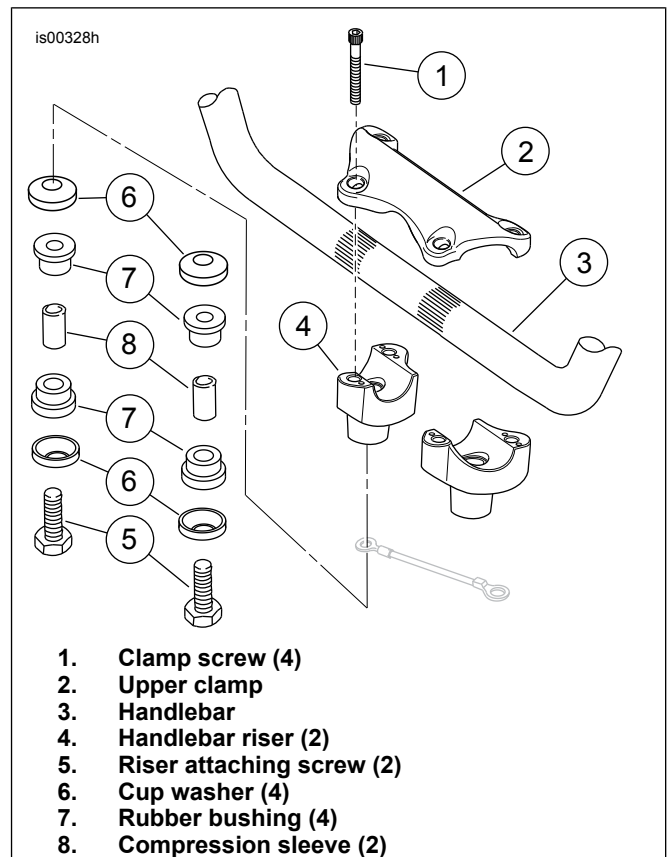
Handlebar Clamp and Risers (FLHT, FLHX)
